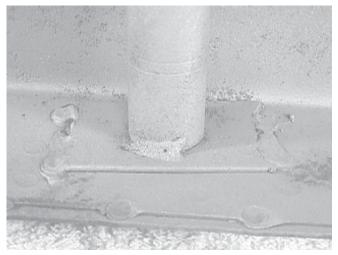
Here's a rarely seen piece of your Tiger. This is the inside of the front frame showing the lower framerail, the tubenut, and the small sheetmetal flange between the two. In typical failures, these components move downward as a unit. The outer spot welds tear away from the top portion of the outer flange and the loading shifts 100% to the upper flange. At that point there will not be any outward indication. As the crossmember attachment bolt continues to pull down on the tubenut, the top surface deforms and eventually the top weld breaks.
